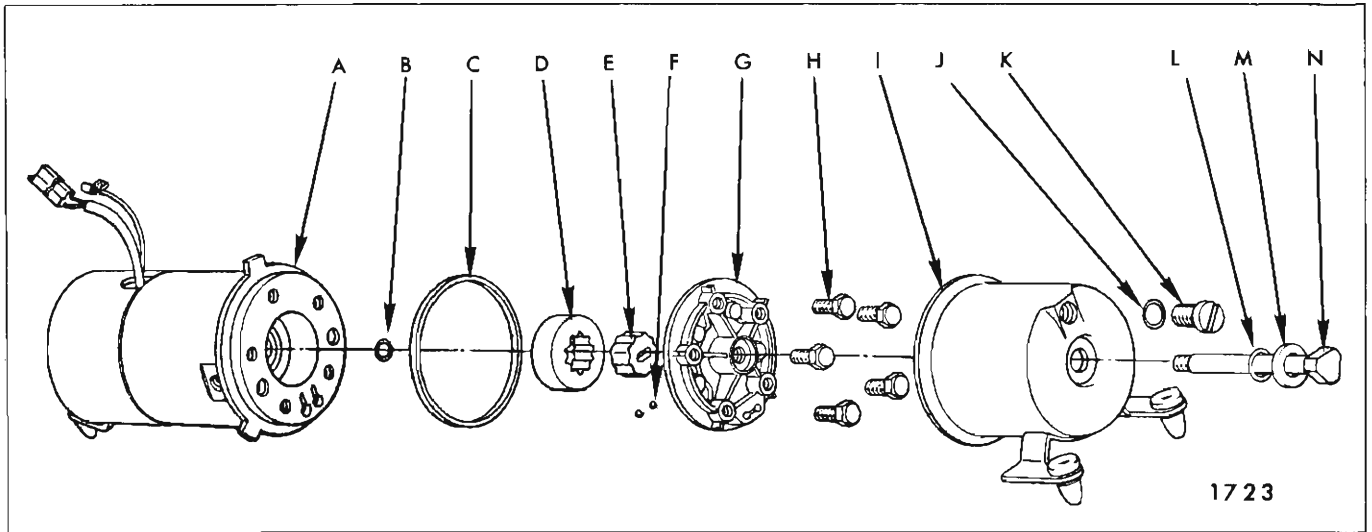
Hydro-Lectric Motor and Pump Disassembled
